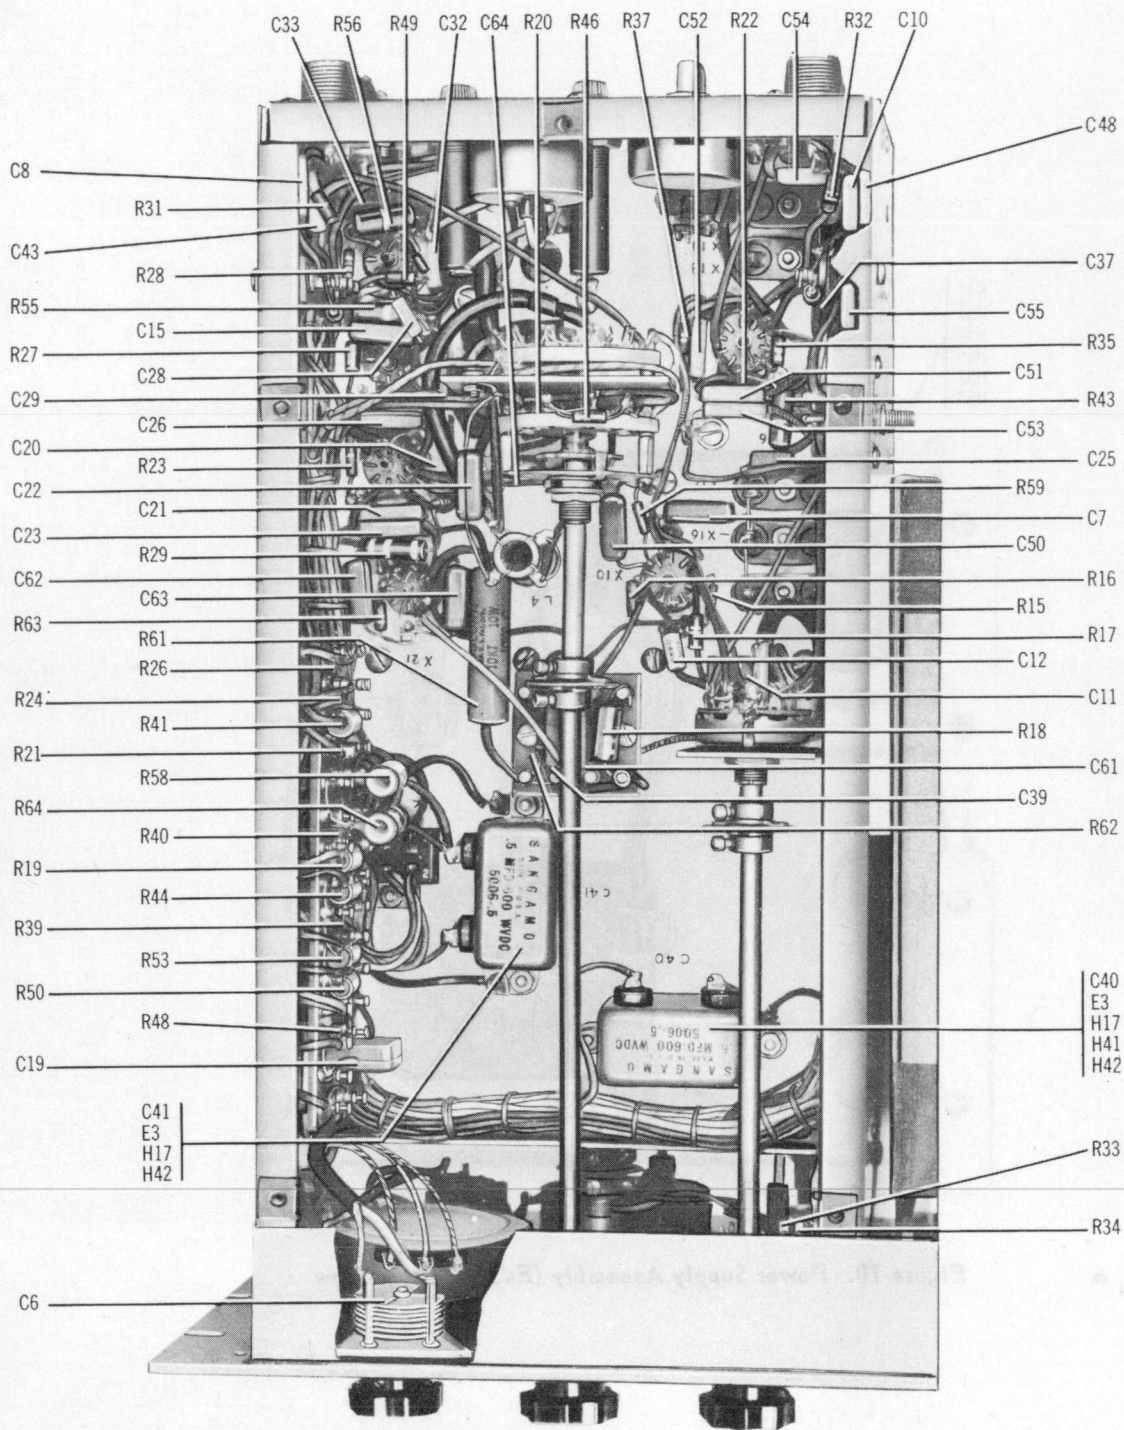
Front Panel and Chassis Assembly (E37), Chassis Bottom View
